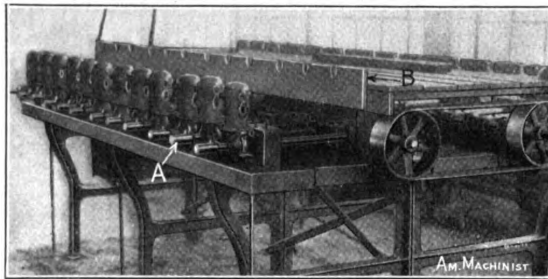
SPECIAL TESTING STAND FOR RUNNING IN MAIN ASSEMBLY
